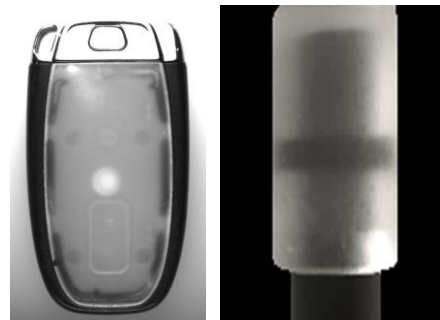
NIR images of a welded car key (left) and a radial tube-connector coupling (right)
